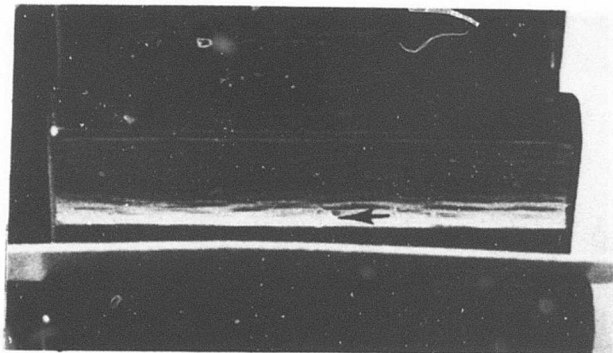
Lower Sun Gear Following $345^{\circ}\pm 5^{\circ}\text{F}$ Oil-Out Temperature. Arrow Indicates Debris Damage of Unknown Origin.
